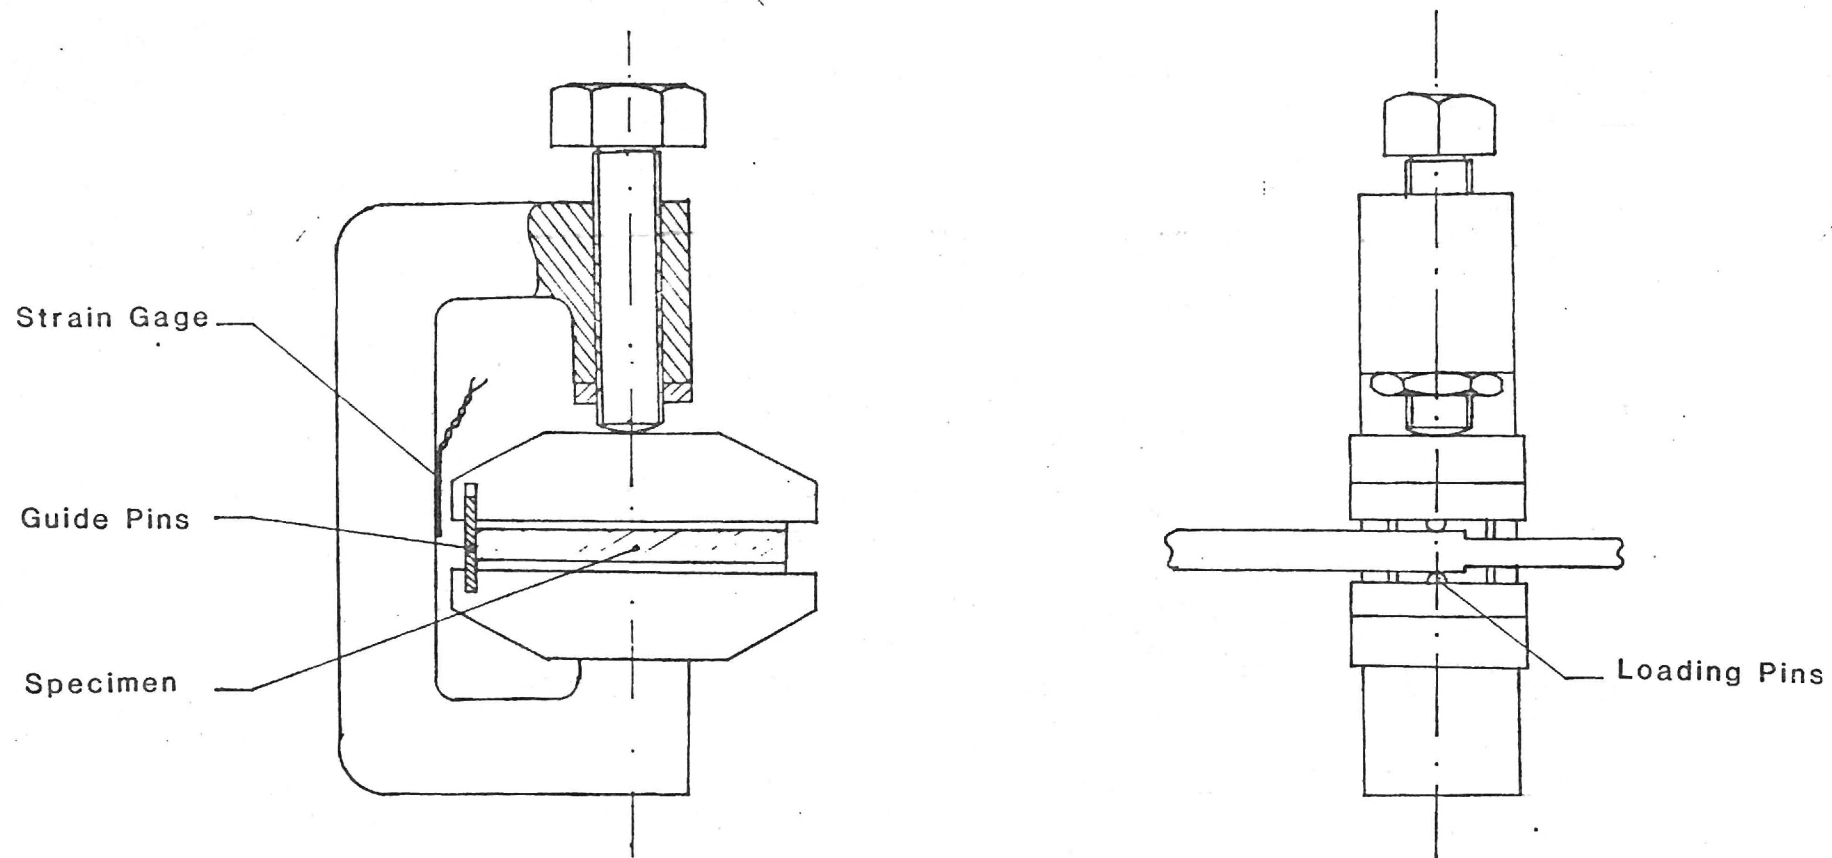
Fixture used to suppress mode I in a double cracked-lap-shear specimen
